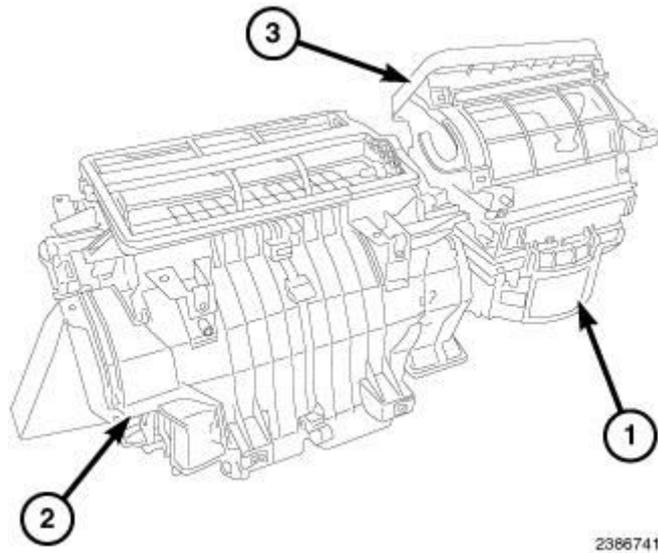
HVAC Housing, Air Inlet Housing & Air Distribution Housing
